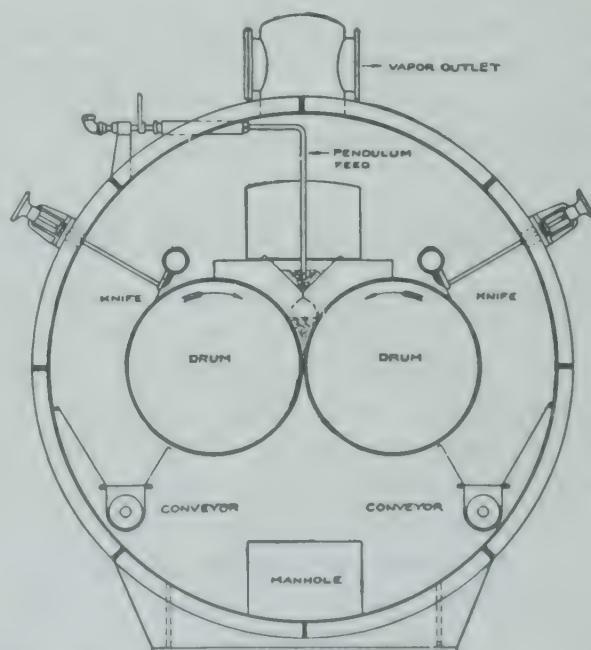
Vacuum double drum drier with pendulum feed. (Buflvak Equipment, Division of Blaw Knox Co.)
